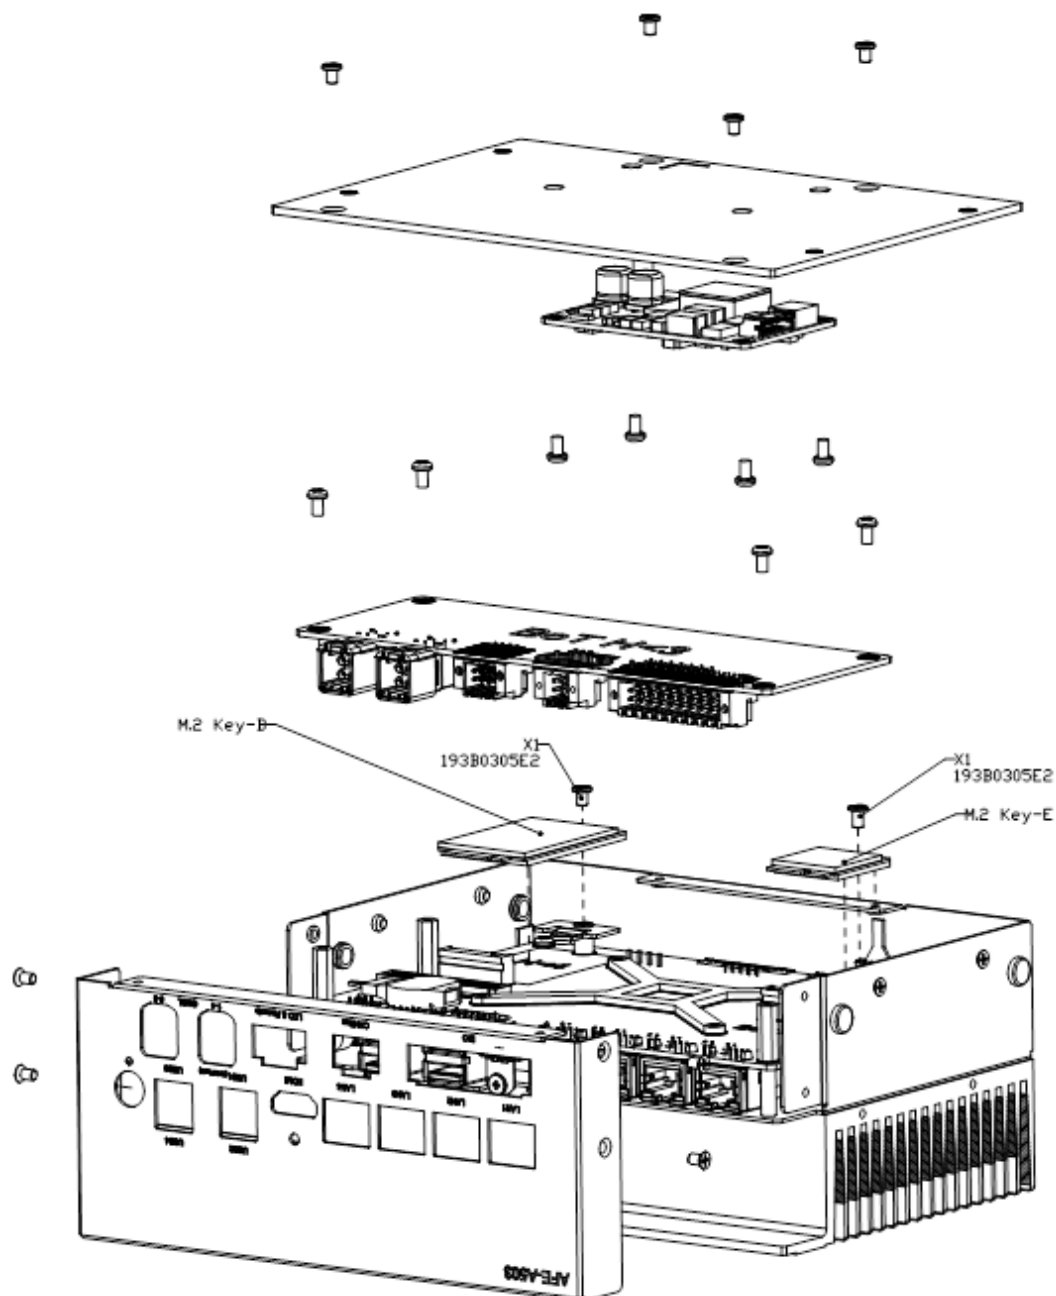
ASR-A503 assembled with cooler and AFE-RM06
